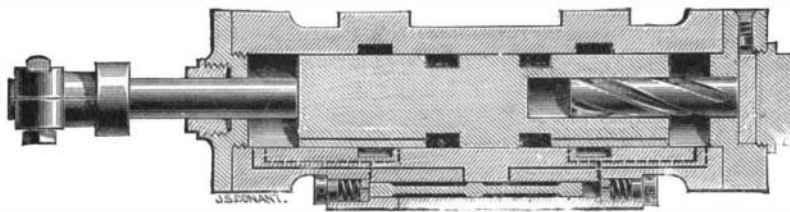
LONGITUDINAL SECTION OF ROCK DRILL.
